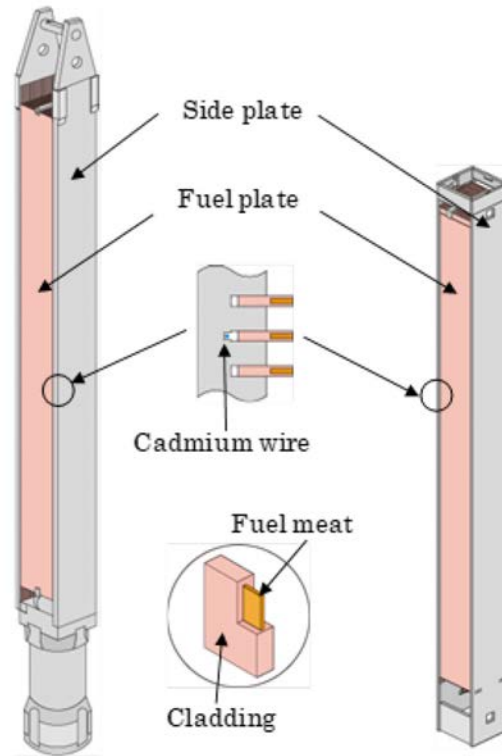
Structure of the standard fuel assembly and fuel follower of the JMTR. Reproduced courtesy of JAEA [I-2].
